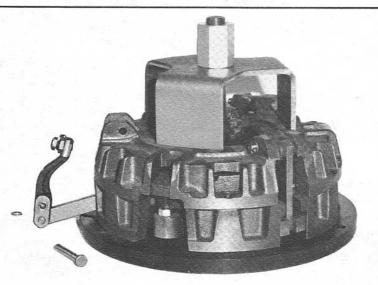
Clutch Disassembly; Removal of Release Lever Pivot Pin.
